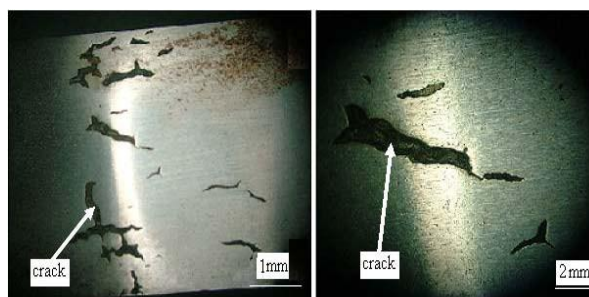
Magnified view of the surface crack obtained in the failed base tube
